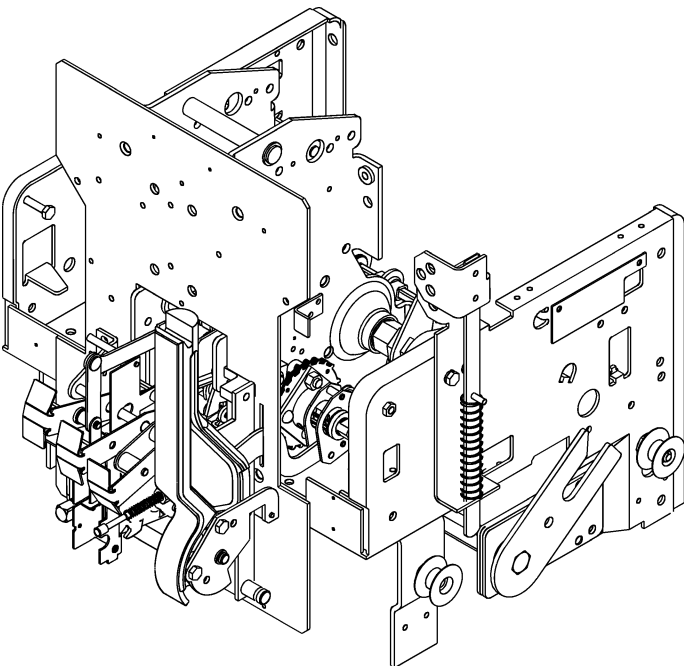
Front Frame Assembly for WPX08, WPS16, WPF16, WPH16, and WPS20.
